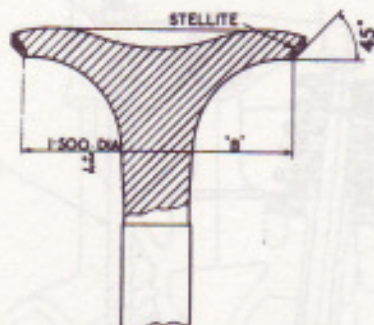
SECTION THROUGH HEAD OF EXHAUST VALVE.
